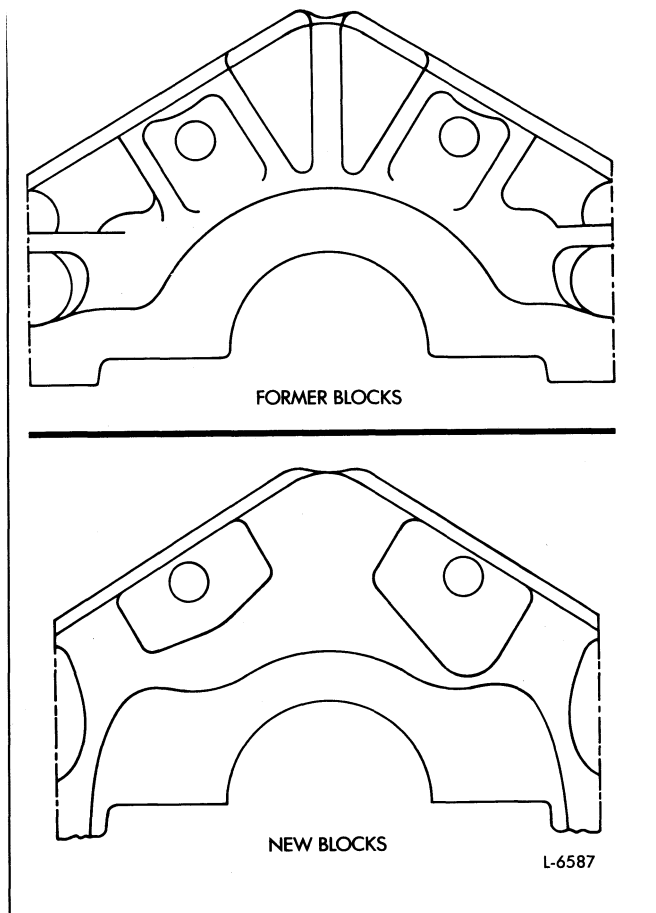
Bearing Journal Web Areas on Former and New Cylinder Blocks
